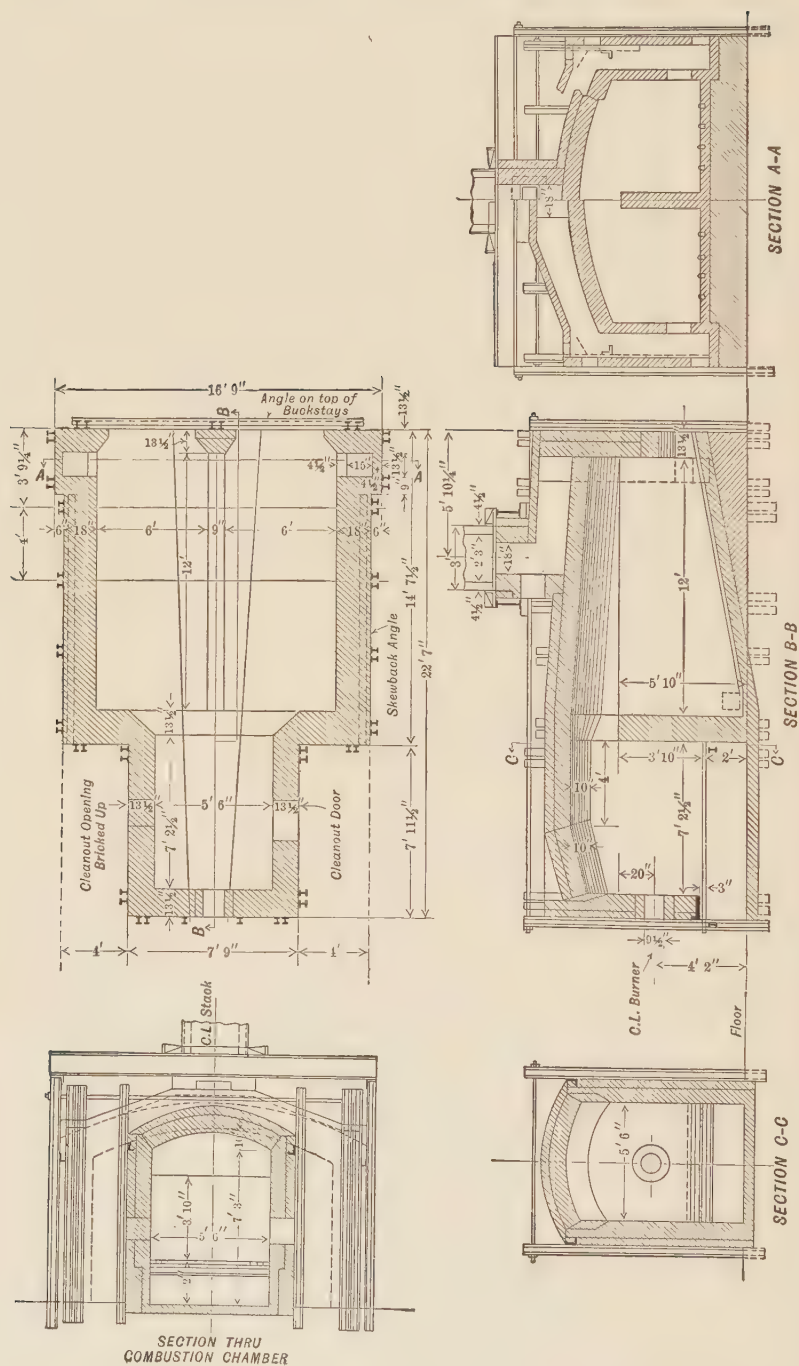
Double sheet furnace with extended combustion chamber for powdered coal.
